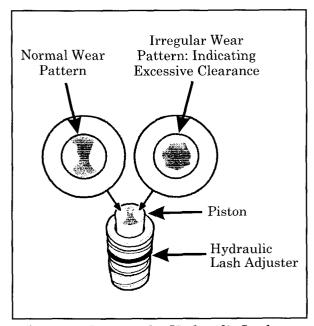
Inspect the Hydraulic Lash Adjuster Surface.
